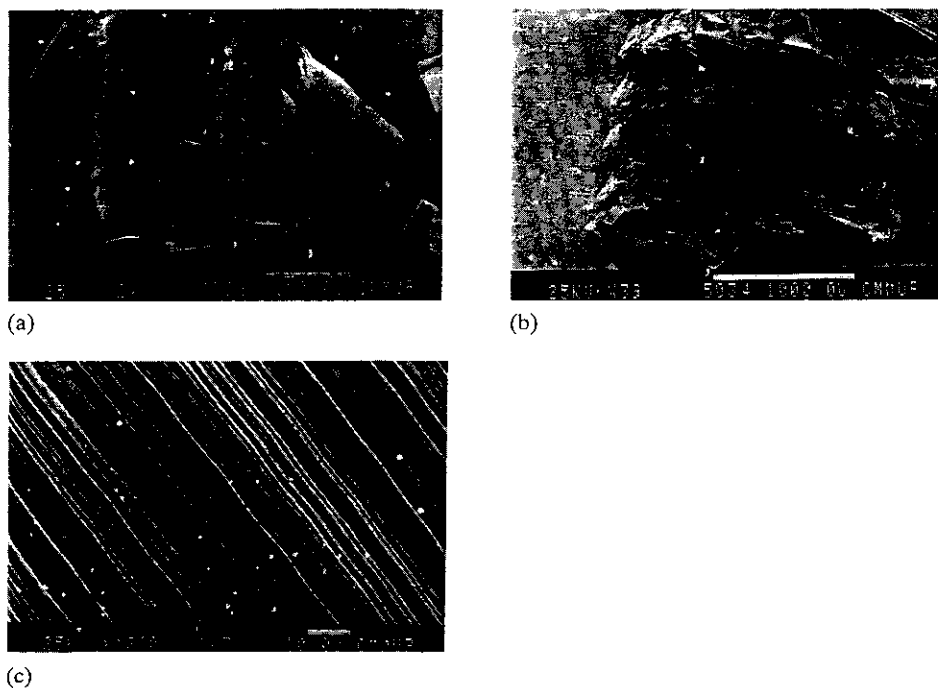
(a) Low magnification of the tool steel chip (SEM). (b) Discontinuous-type chip from β - Si_3N_4 -gray cast iron machining (SEM). (c) High magnification (SEM) of the surface of the tool steel chip in contact with the ceramic.
